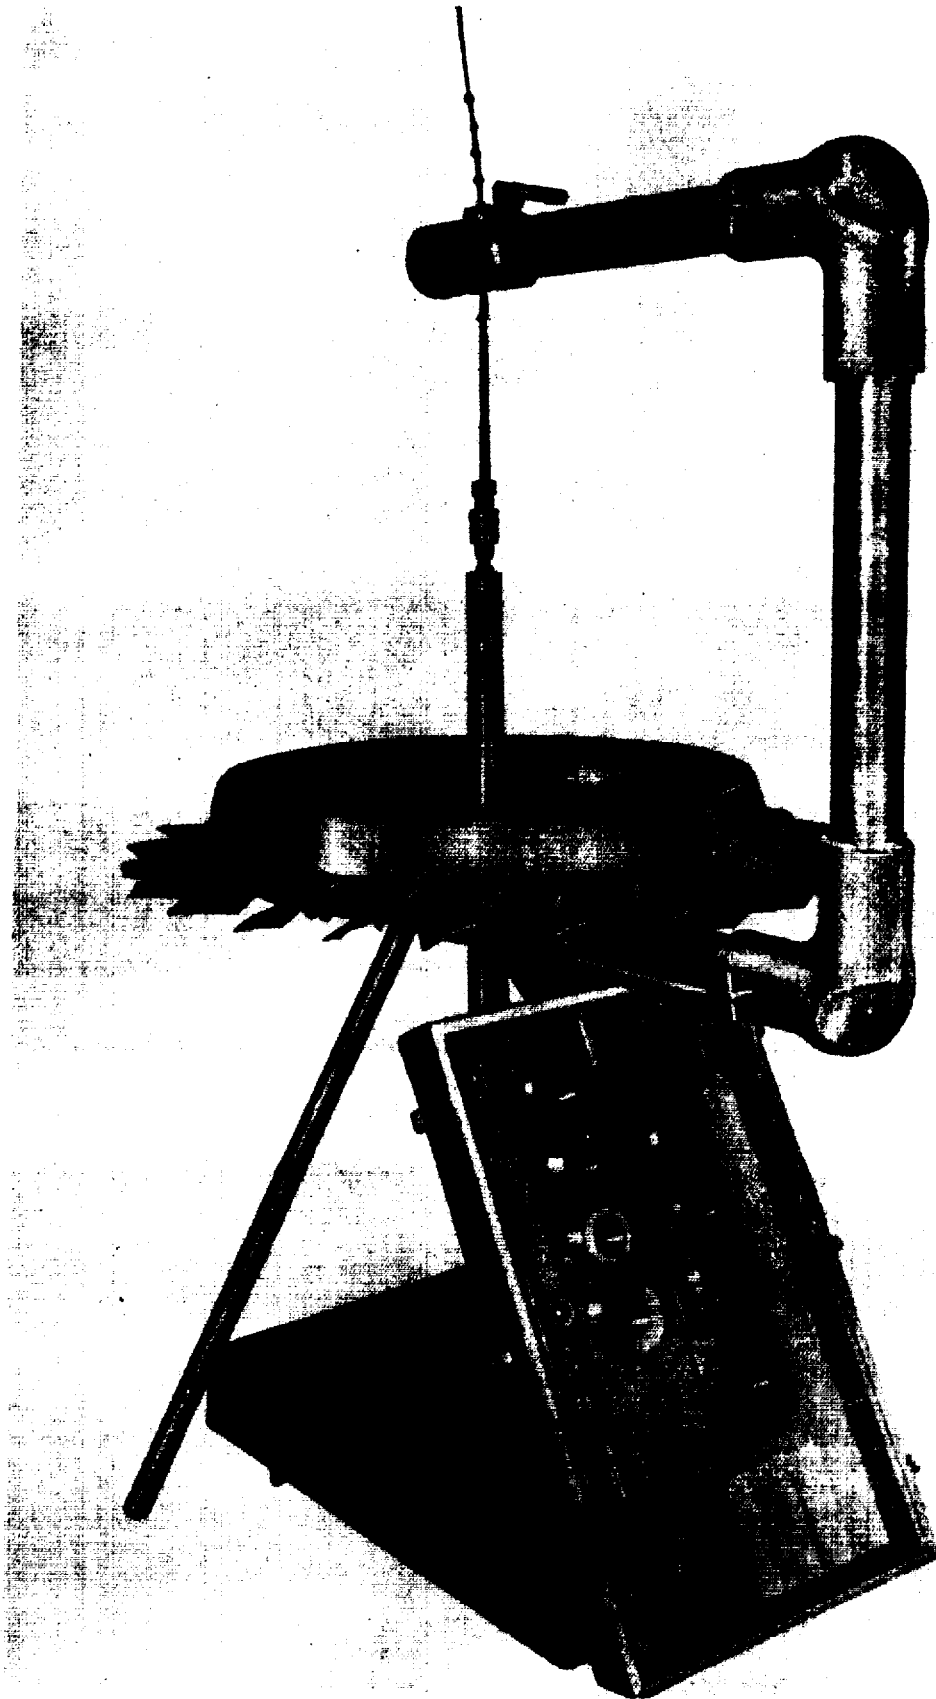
Typical Suspension -- Propeller Assembly Having the Shaft Nut Retained in the Hub (a Pitch Positioning Plate is also shown).
